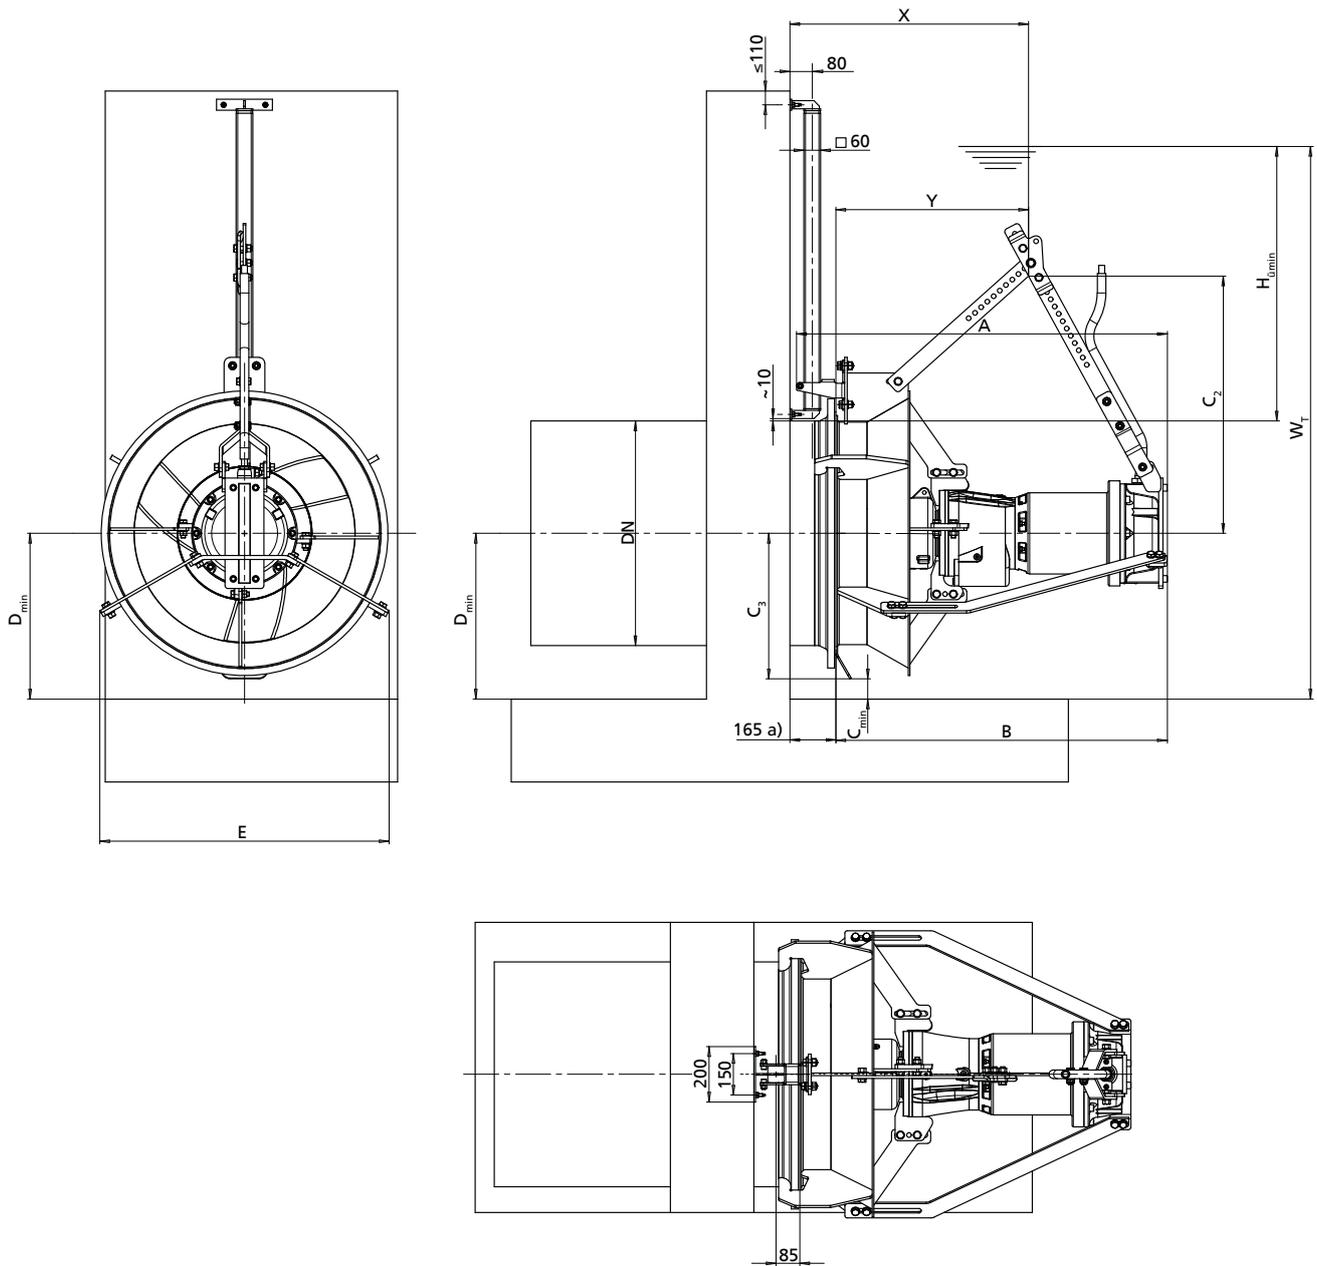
Dimensions of an Amaline 500, 600, 800; motor housing made of grey cast iron
